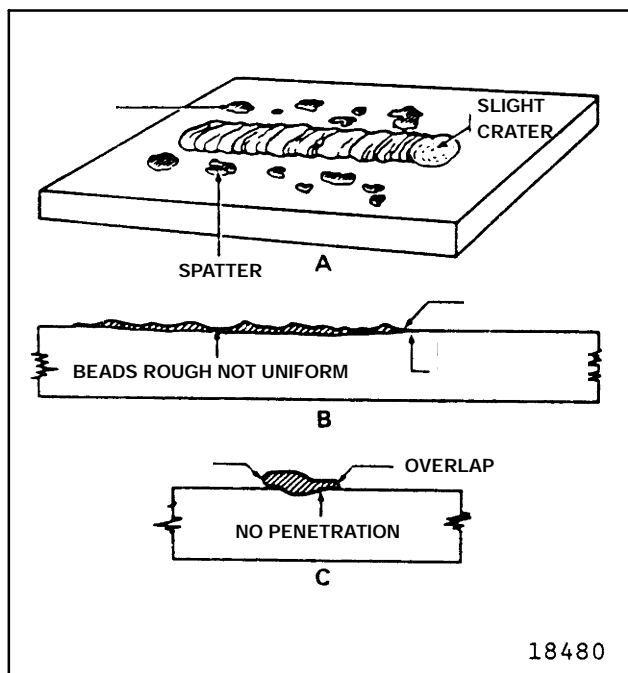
Defects in Weld Due to Long Arc
